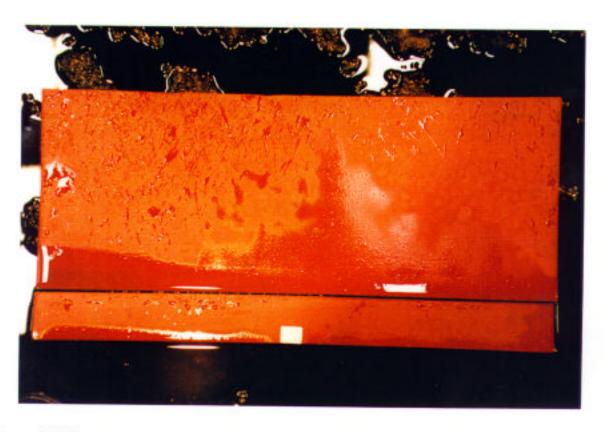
Photograph showing a primer-coated panel severed by the plasma cutting torch. Cuts of all panels were found to be good.
